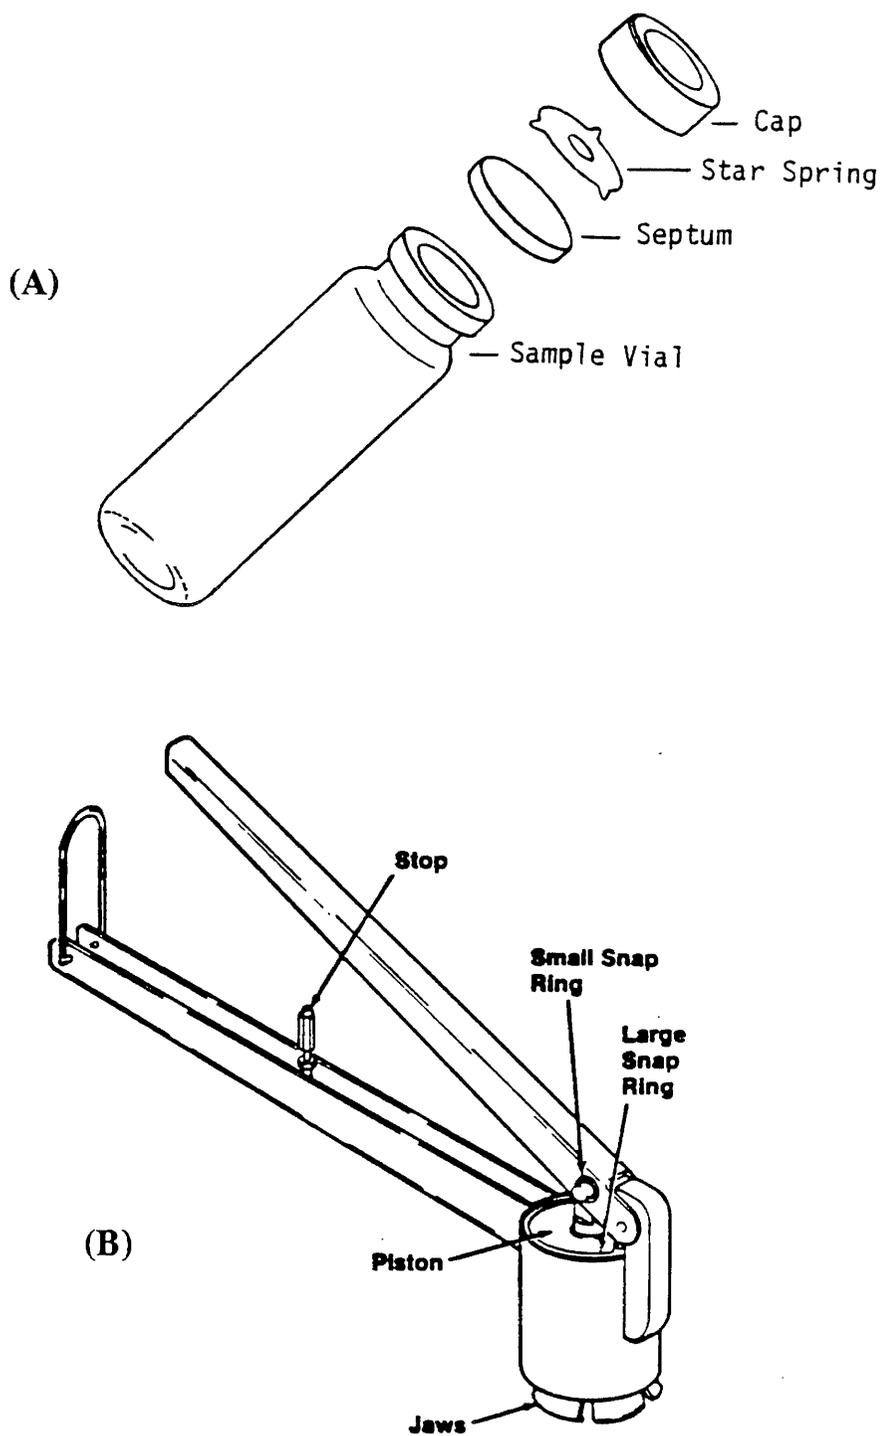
Headspace vial and closure (A) and vial crimper tool (B).
